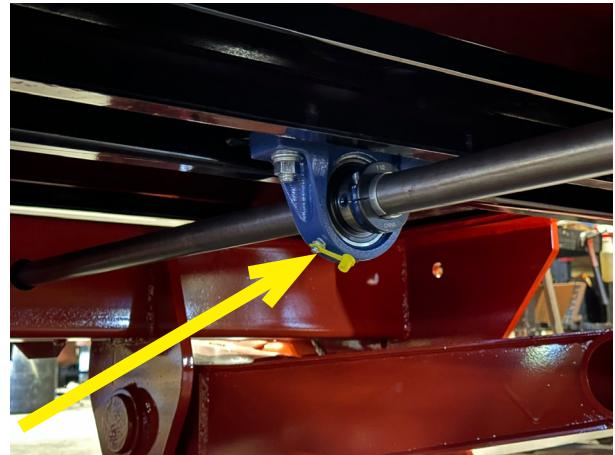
Grease bearing underneath that contains the long driveline. There are 4 bearings.
